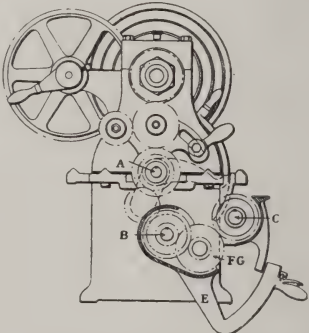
HEADSTOCK AND CHANGE-GEAR (LODGE AND SHIPLEY) END VIEW.
